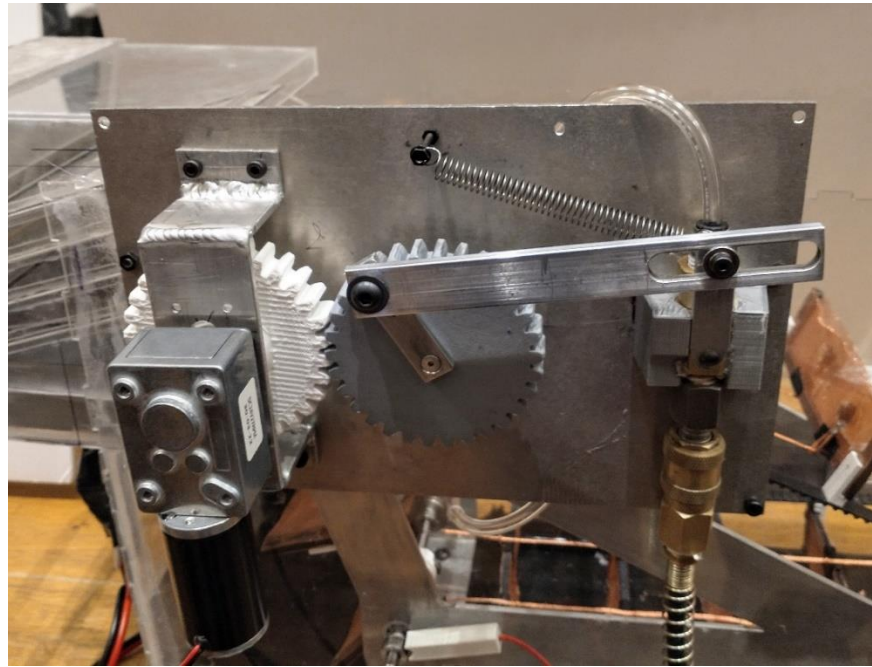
Finished Mechanical Linkage Assembly, Closed Position
